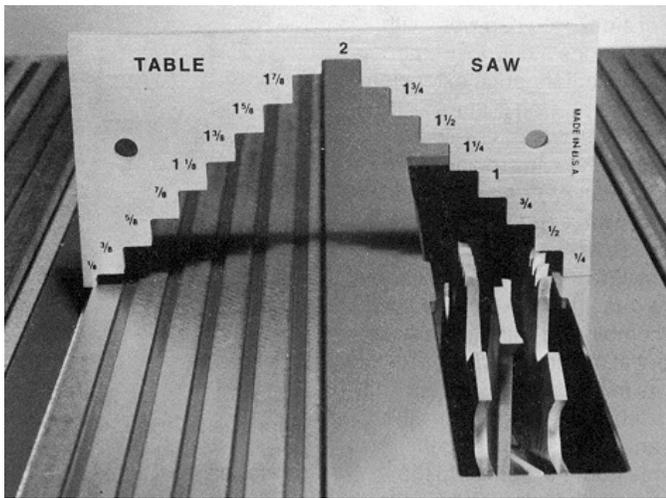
The projection of the dado accessory can be set by using a step gauge.
